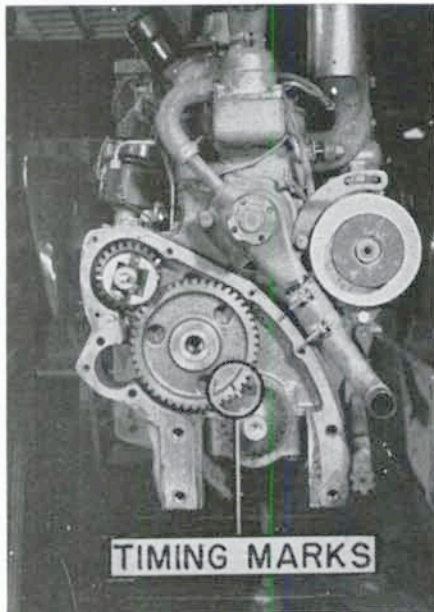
D-14 and D-15 non-diesel timing marks on camshaft gear and crankshaft gear. The governor and distributor drive gear, also shown, may be meshed in any position; ignition timing being made at distributor. Timing marks for D-17 non-diesel engines are similar.
